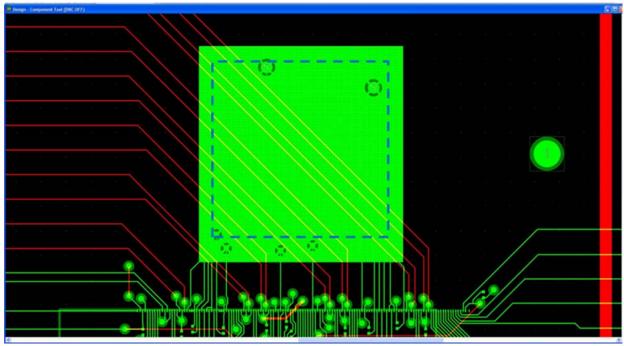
The modification of the existing Phase-1 testing PCB required for a low mass telescope is shown above. The layout of the ground pad under the sensor is shown. The top layer is green, the bottom layer is red. The square indicated by the dashed blue line must be removed by machining. This will cut the red bottom layer traces that are running through this area. Fortunately, these traces are the parallel sensor outputs which are unused in our application. The pads that lead to these traces will not be bonded out.
